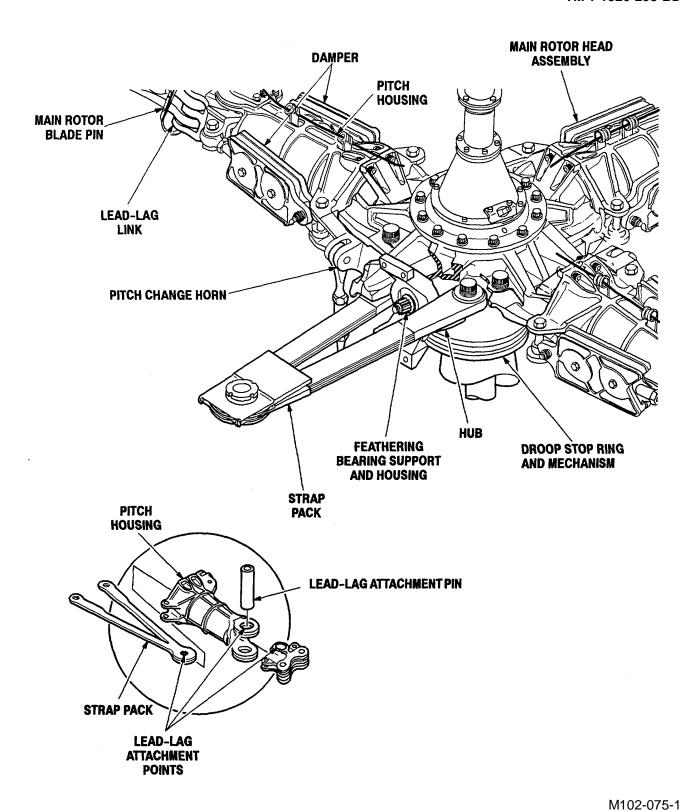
Main Rotor Subsystem Component Location (Sheet 1 of 6)
